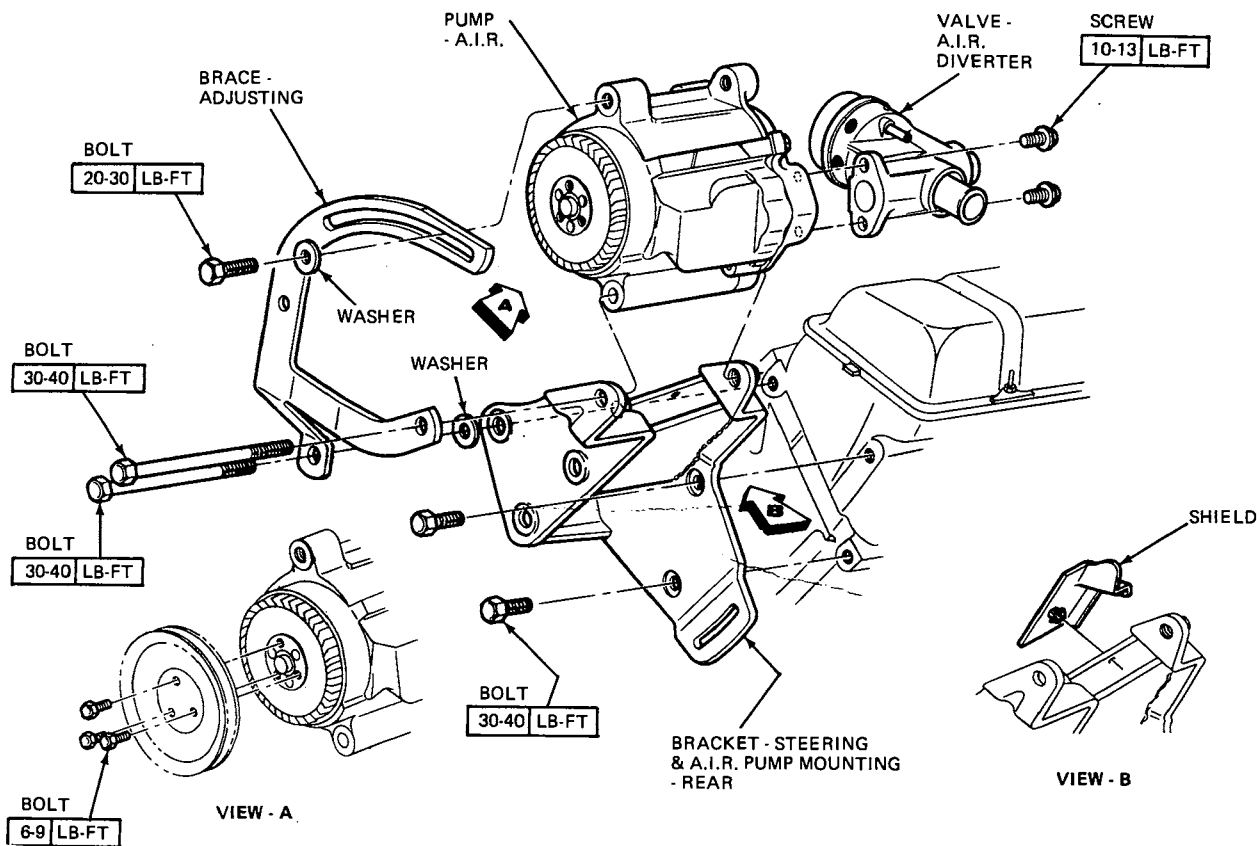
F-36 - 350 Engine A.I.R. Pump Mounting
